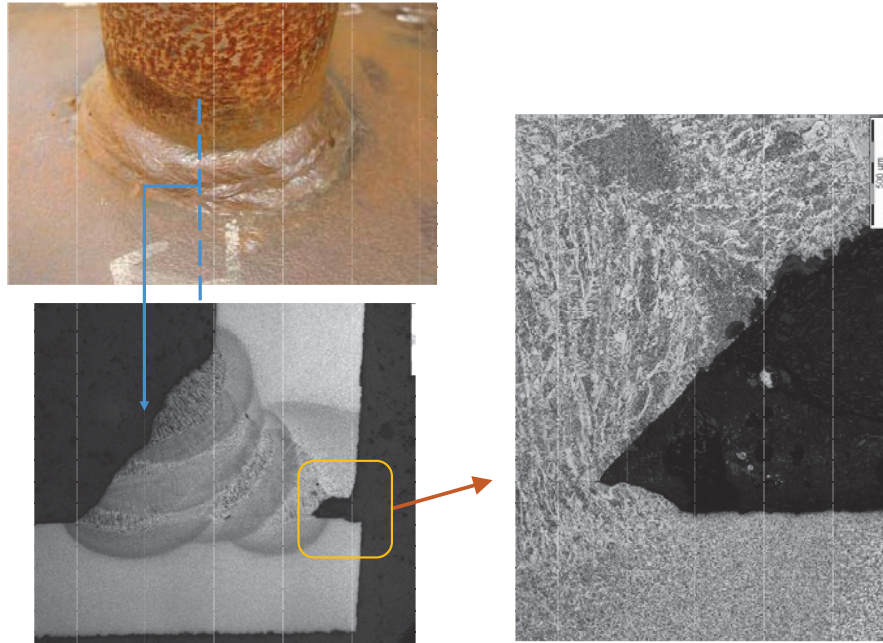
Macro and microphotographs illustrating that the root of the partially welded nipple (#6-13716) and the weld toe remained intact after 555780 cycles.
